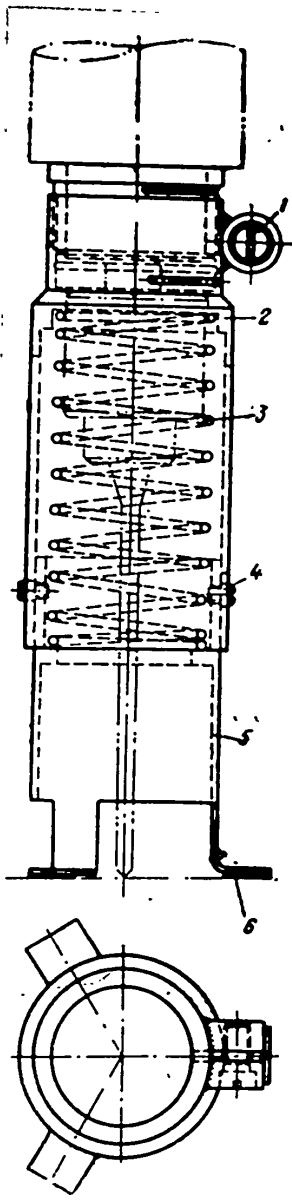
Attachment on Hand Drill to Ensure Perpendicularity of the Holes
